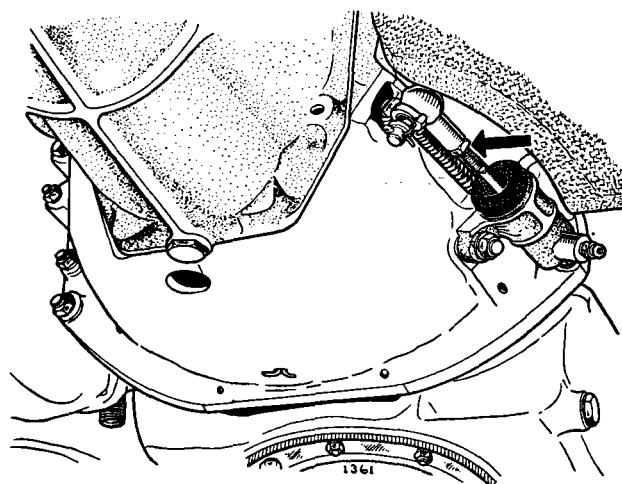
Adjustment of clutch operating rod (Early Cars).
